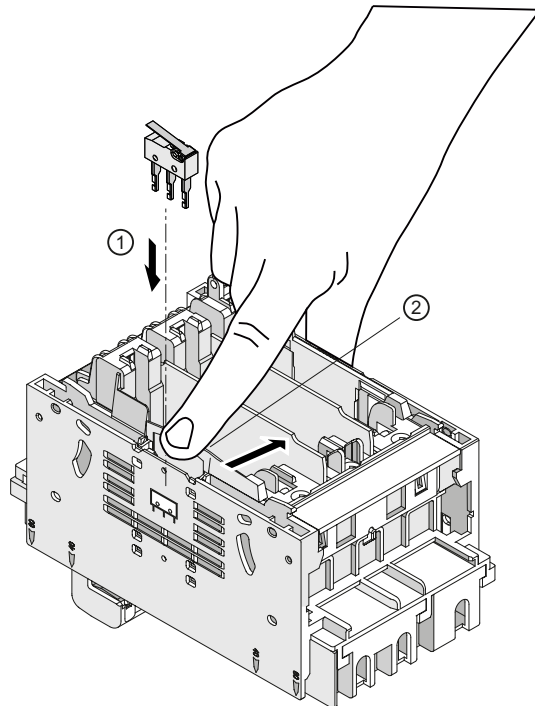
Installing the auxiliary switch, size 000 (1)
